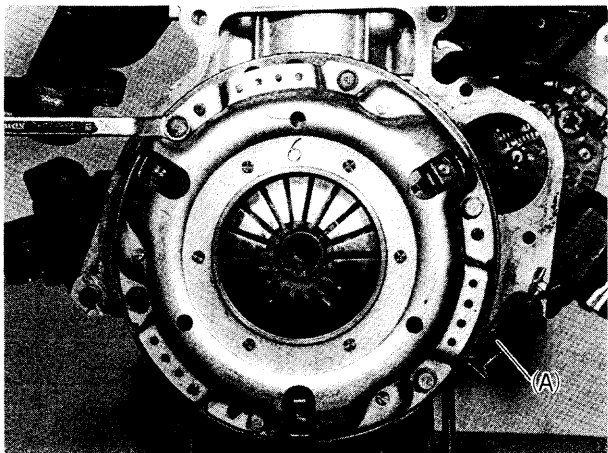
(A) Flywheel holder (Special tool 09924-17810)
